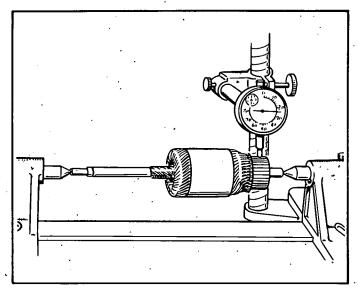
CHECKING COMMUTATOR RUNOUT
